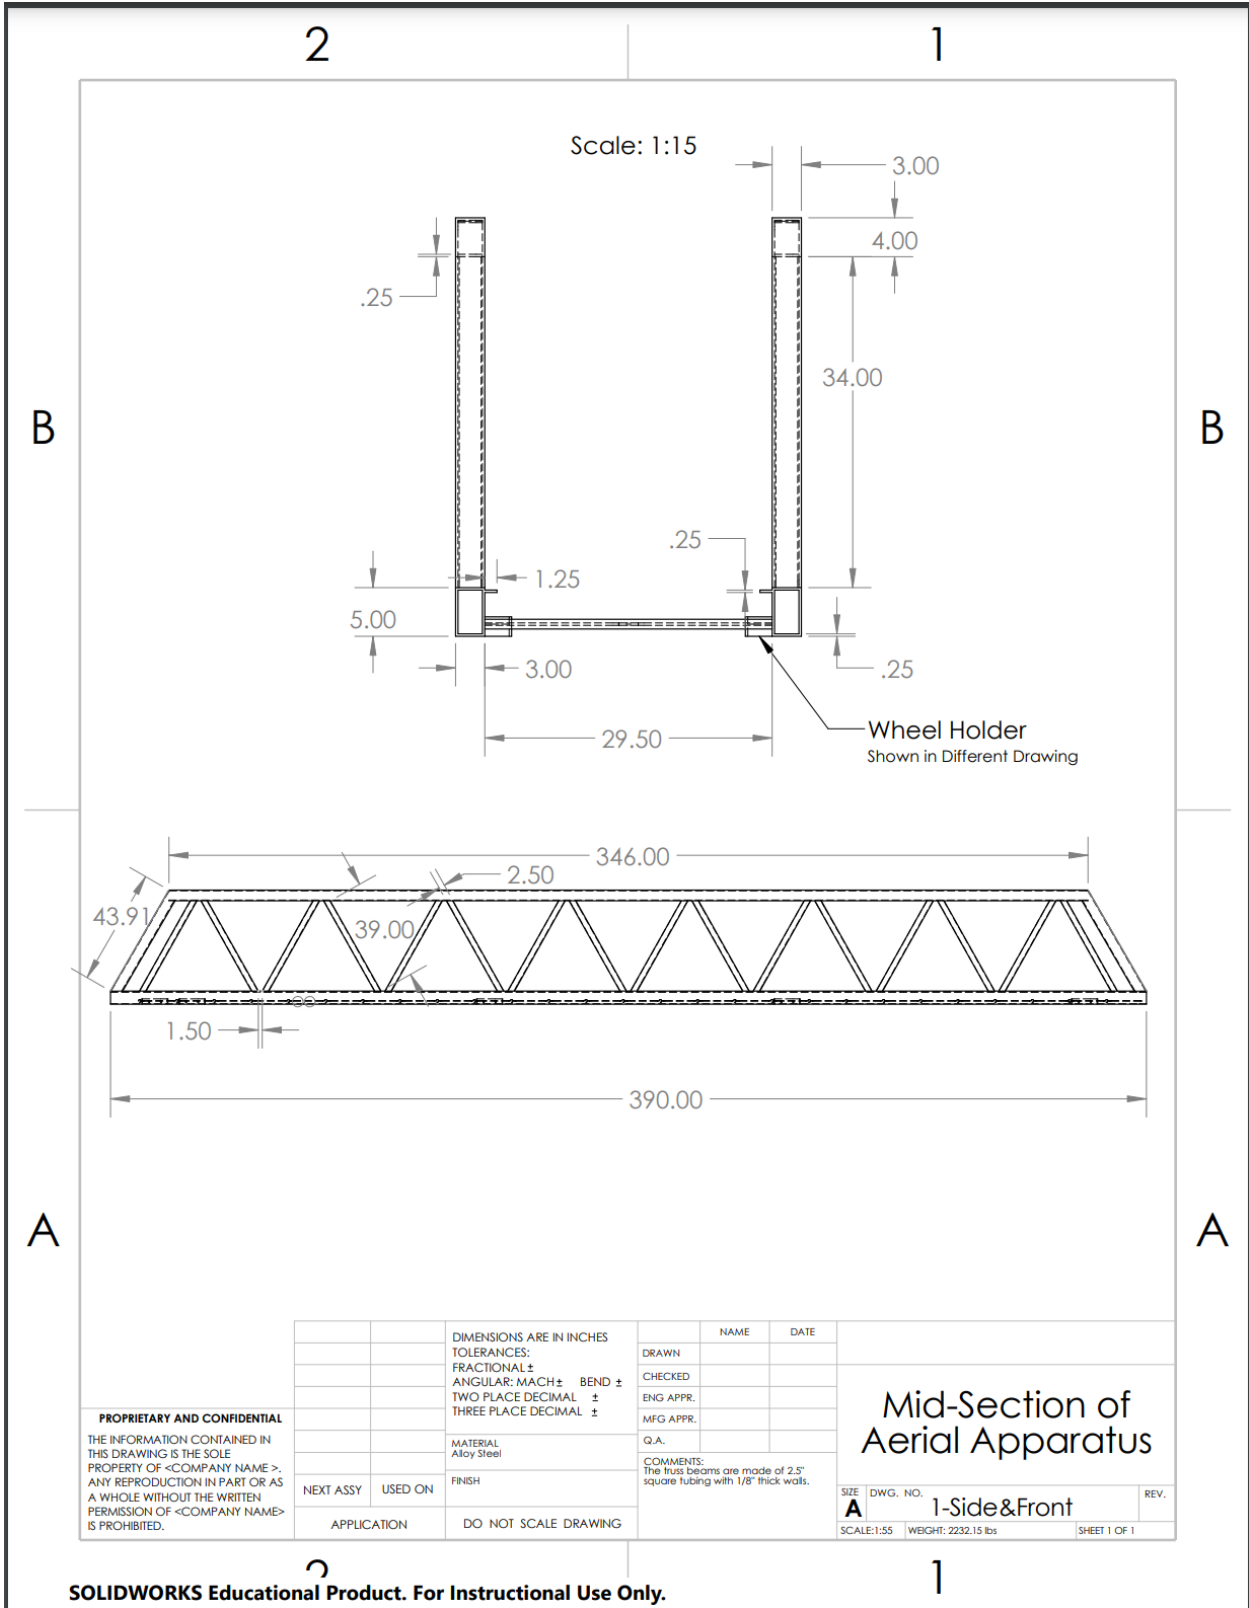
Side and Front Views of the Dimensioned Drawing of the Mid-Section of the Aerial Ladder
